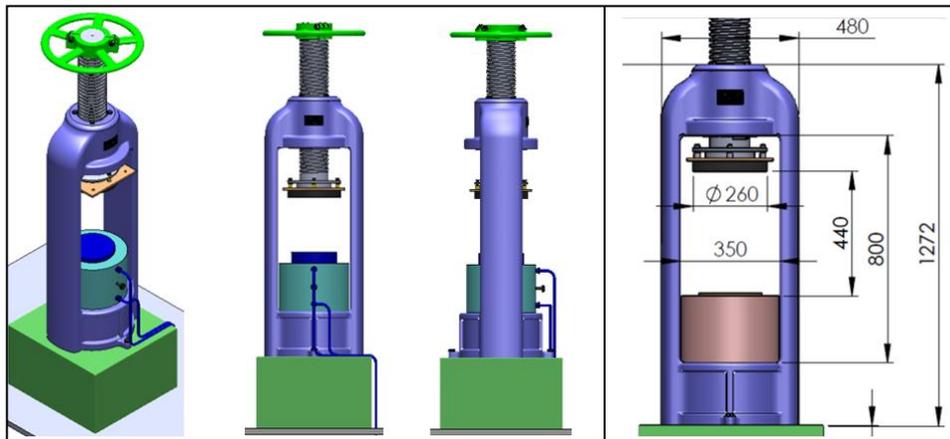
Schematic illustration of compression testing machine in various views with main dimensions in mm
